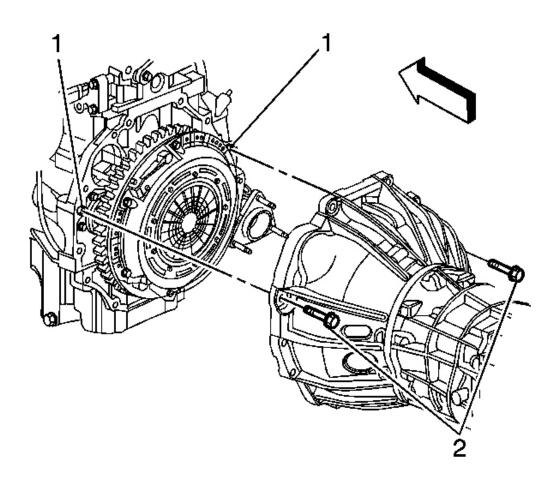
View Of Transmission Mounting Bolts & Engine Dowels Courtesy of GENERAL MOTORS CORP.
